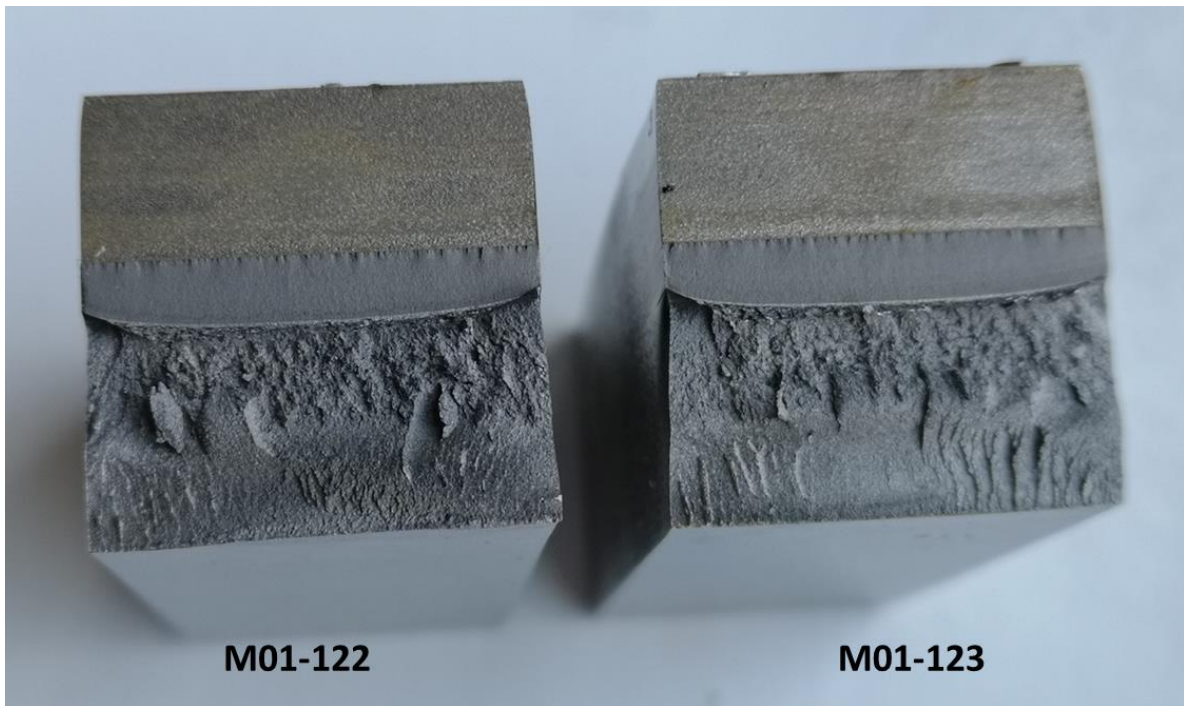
Fracture surface after the test showing the initial and final crack lengths of M01-122 and M01-123
